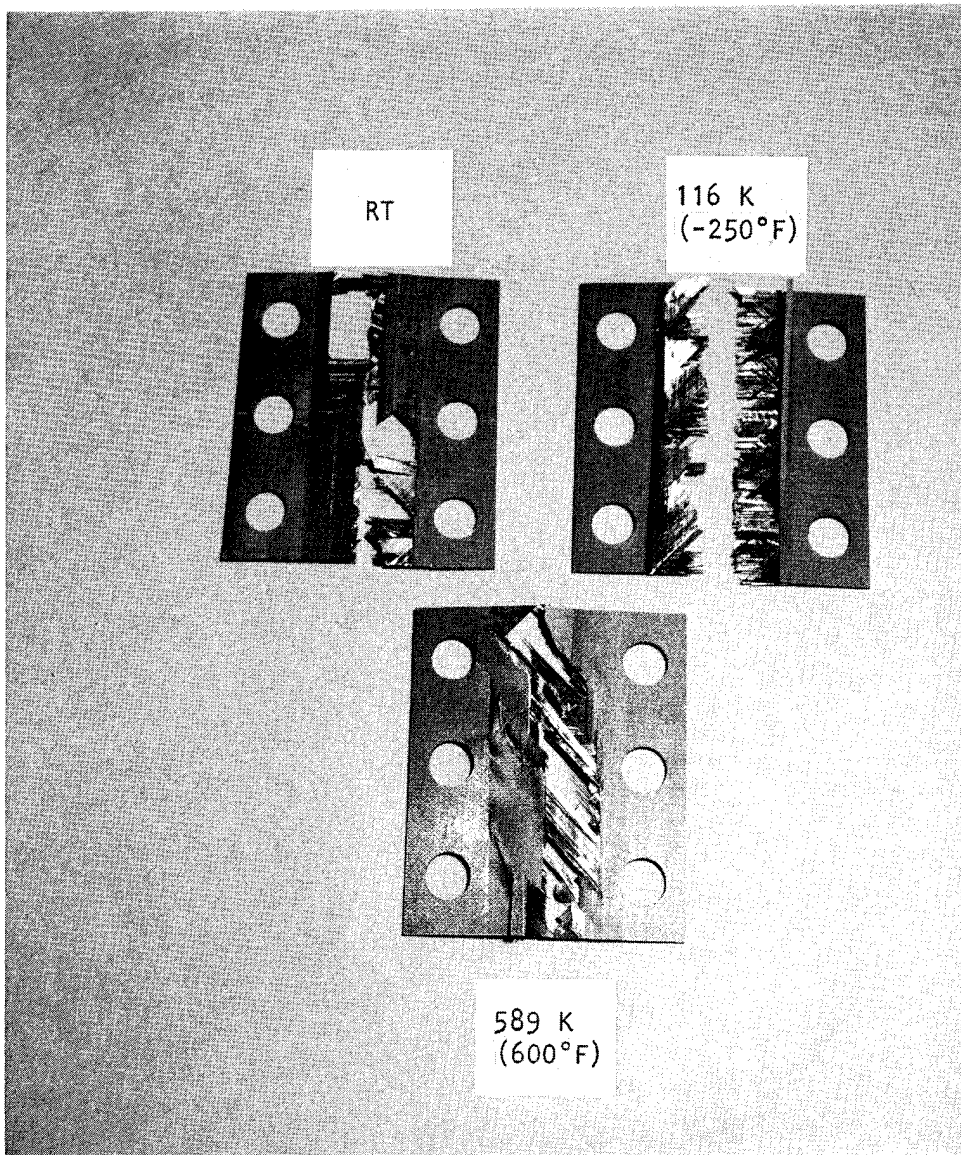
Typical rail shear failures for baseline dry (0/45/90/-45)_s laminates
